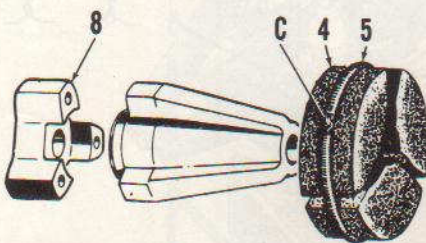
Special tool is available for sliding clutch shoes (4) and garter spring (5) onto driver (8). Connection of garter spring ends (C) should be at middle of clutch shoe.
